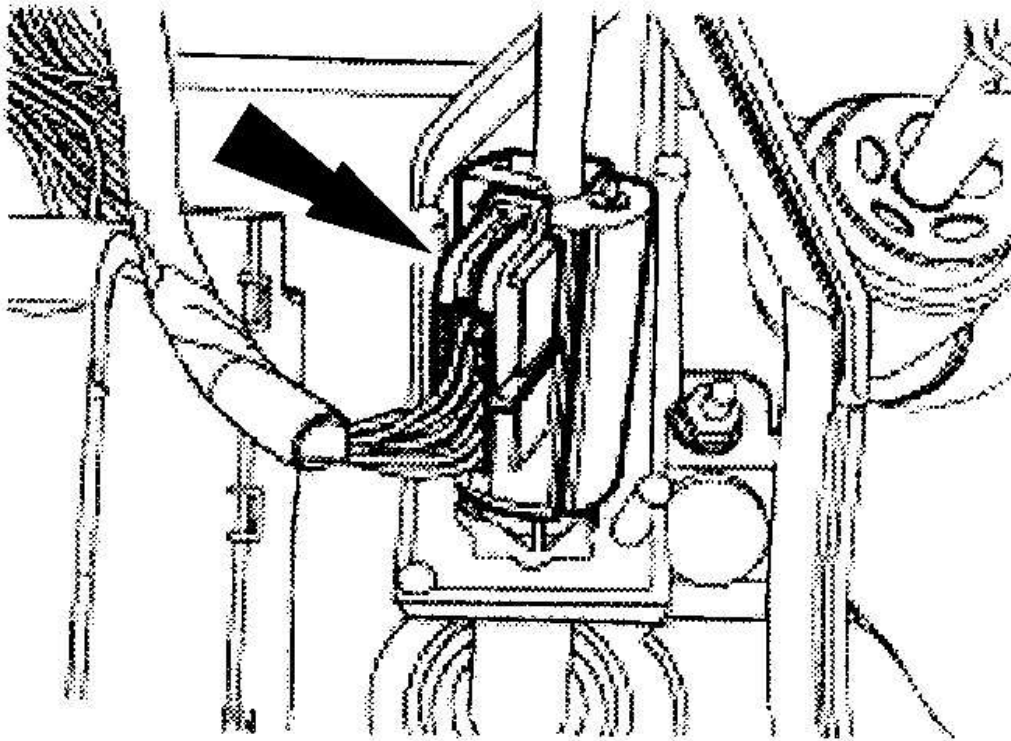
Removing & Installing Lower Steering Column Finish Panel
